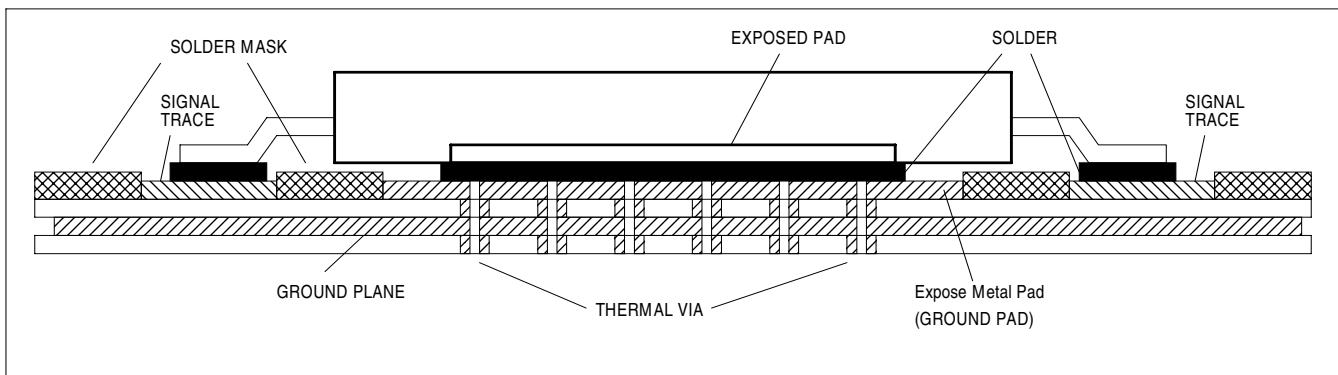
P.C. BOARD FOR EXPOSED PAD THERMAL RELEASE PATH EXAMPLE
